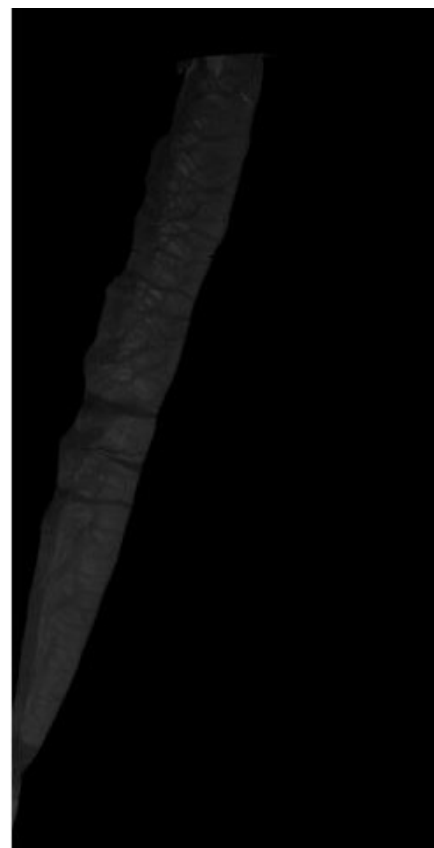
Trial 7 - Two-piece billet pour, poorly welded
